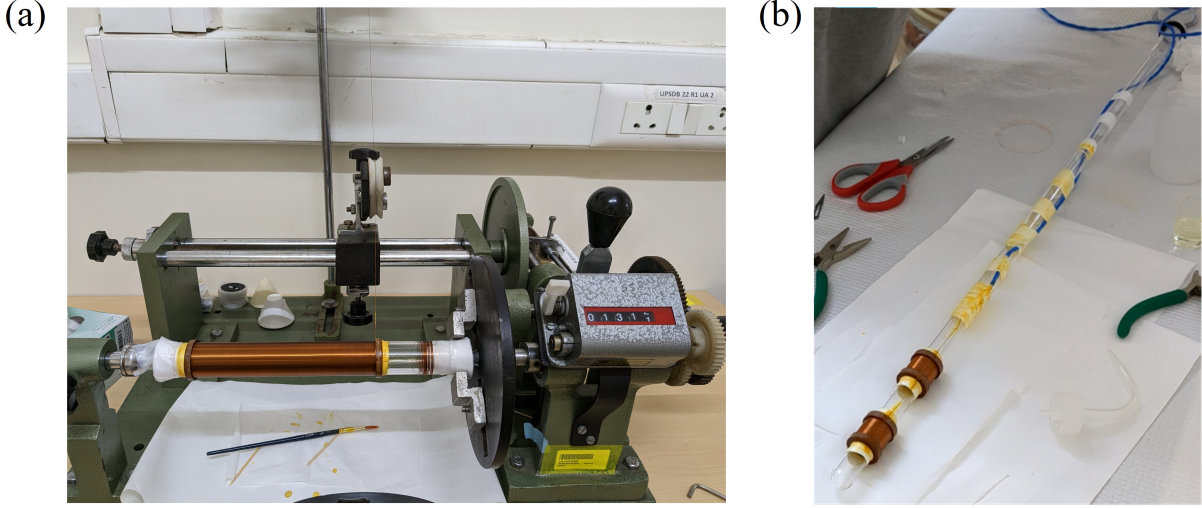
(a) Primary coil being wound using linear coil winding machine. (b) Secondary coil
